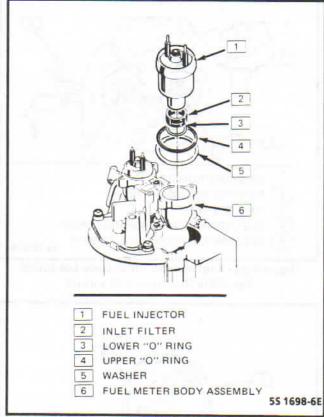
Model TBI 220 Fuel Injector Parts
